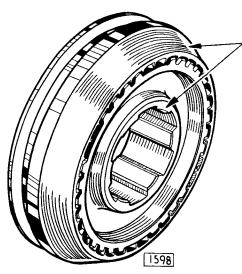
The wide chamfer end of the operating sleeve must be fitted to the same side as the large boss of the inner synchro sleeve.
